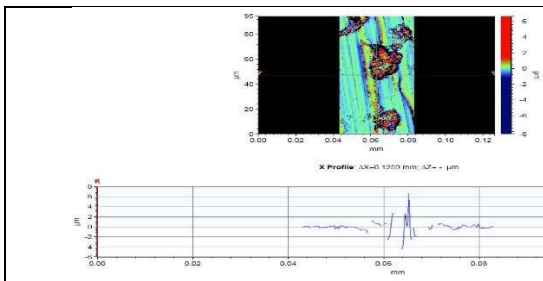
(a) Average Surface Roughness scan recording for a welding height of 1mm and welding current of 30A. Burned samples detected
